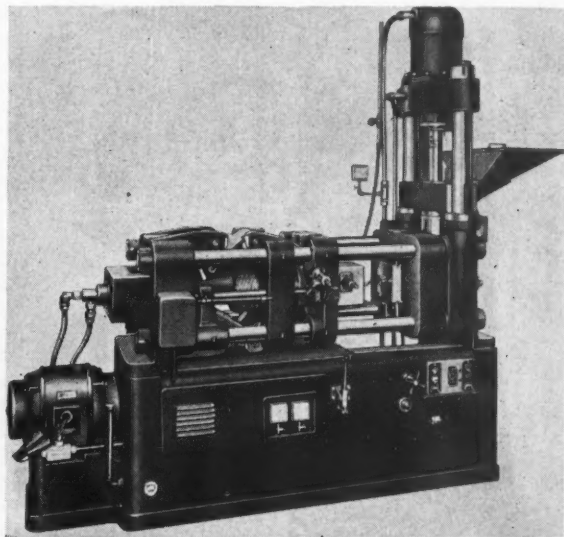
General view of the Lester injection molding machine, showing, at right, the vertical ram by which plastic is forced into the mold, the latter being shown in open position.
